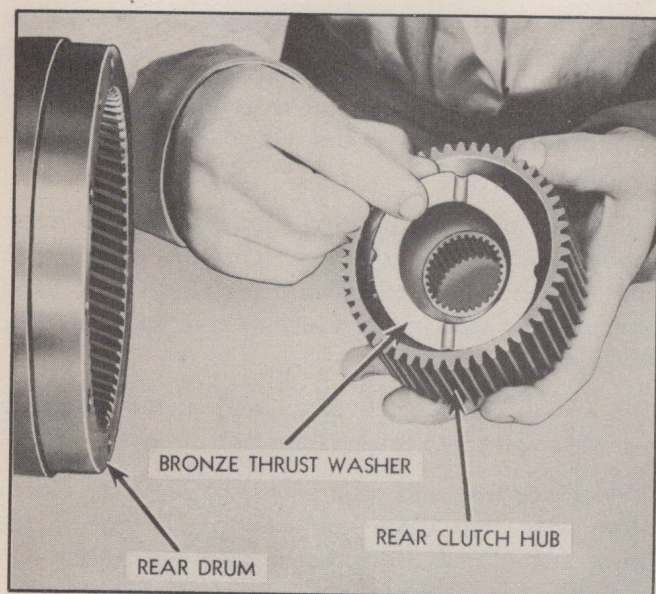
Installing Rear Clutch Hub Front Thrust Washer
